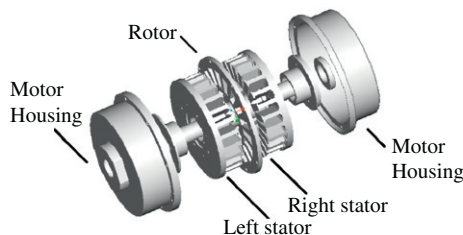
Exploded graph of axial-flux dc brushless wheel motor and its stator phase windings.
